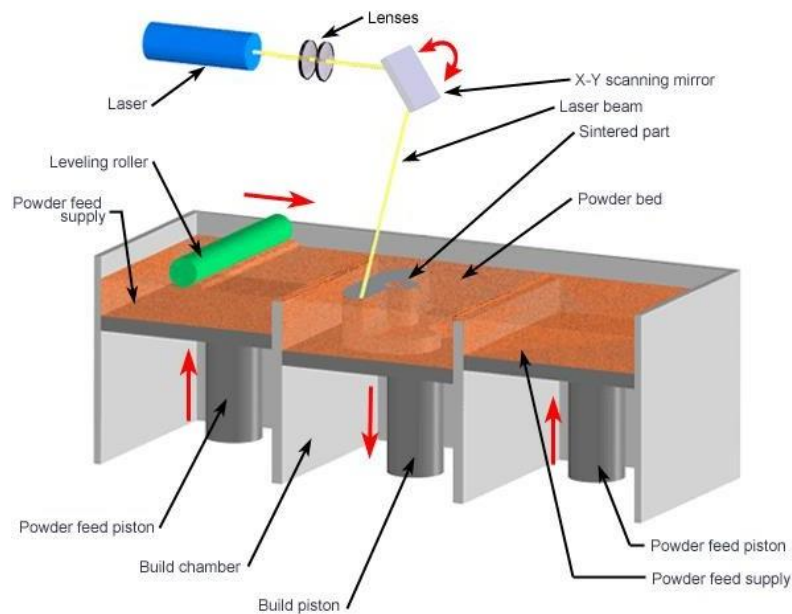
Illustration of selective laser sintering (SLS) printing process. [28]
